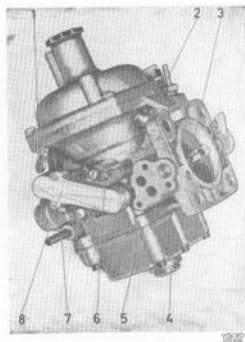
Stromberg-carburetor, right side, B 20 A
